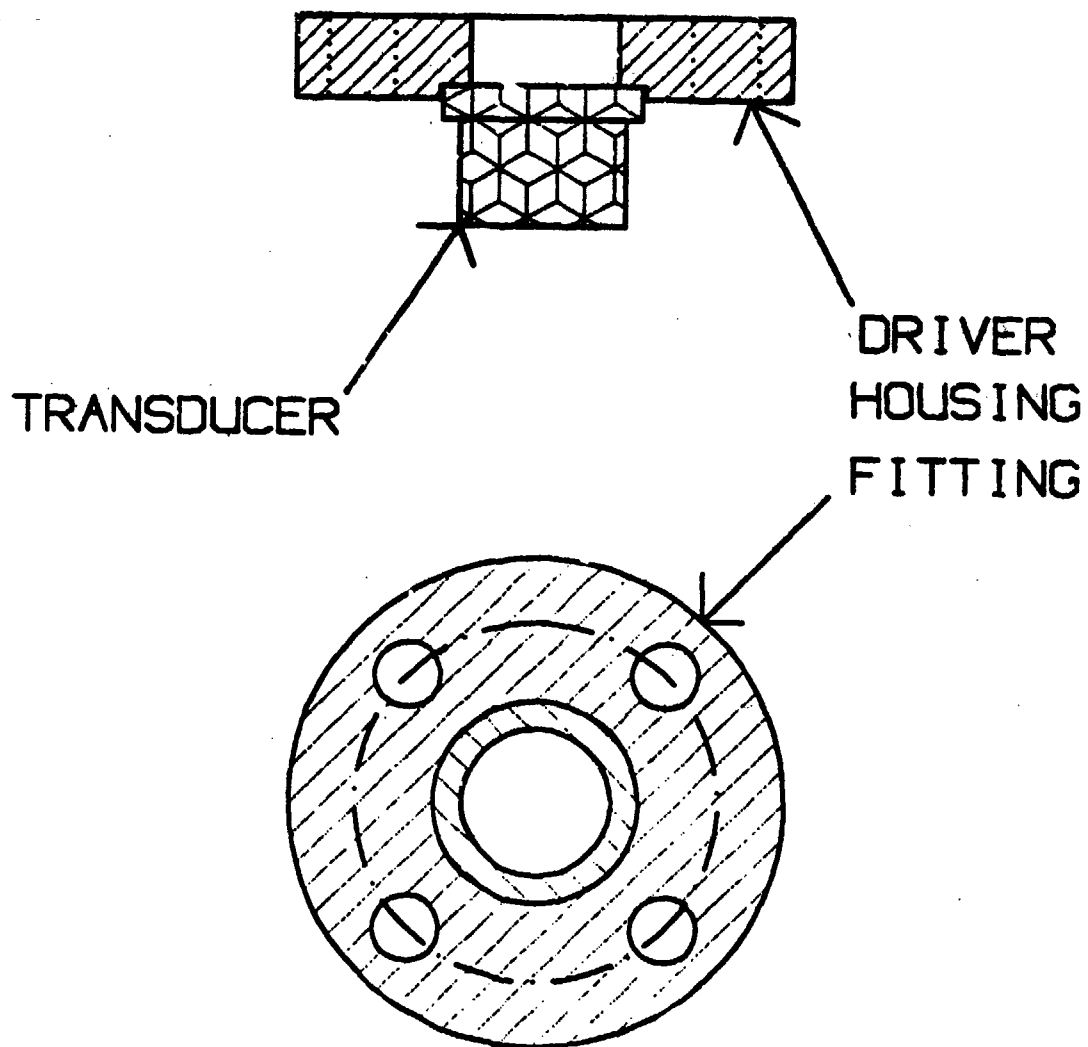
DC Pressure Transducer and Driver Housing Plug Fitting.
